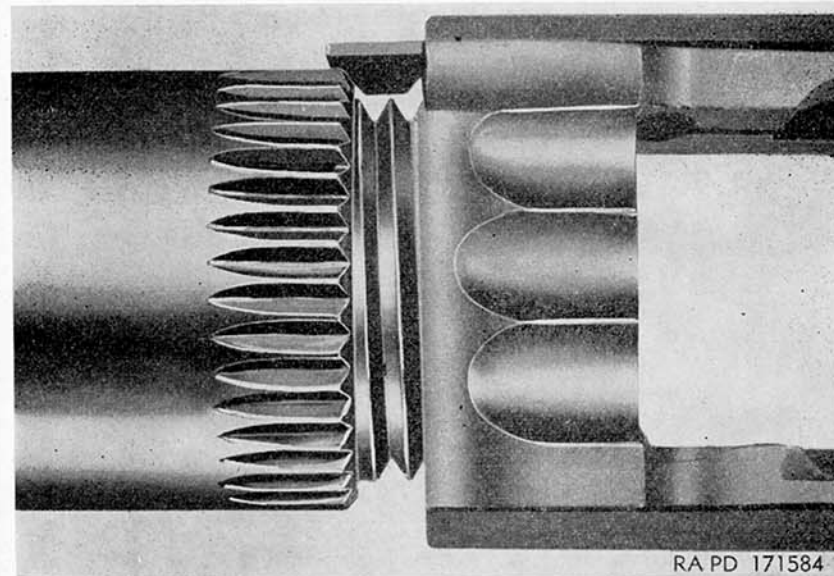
Cal..50 machine gun barrel engaging end of barrel locking spring.
